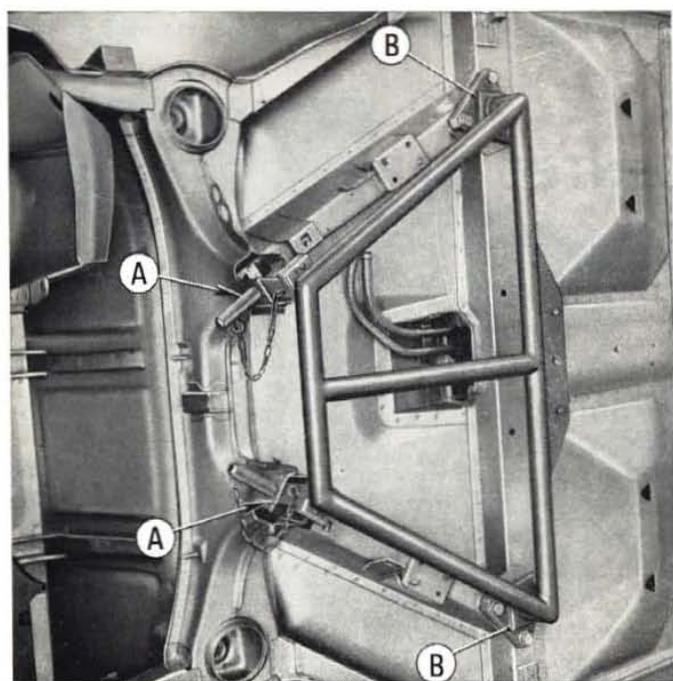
Detail showing use of gauge A. 74141 for checking underbody rear.
